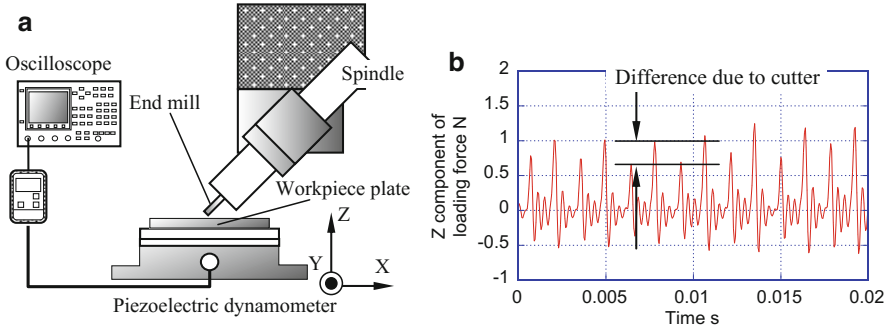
Adjustment of cutter runout: (a) measurement of contact force; (b) difference of Z component in loading force due to cutter runout
